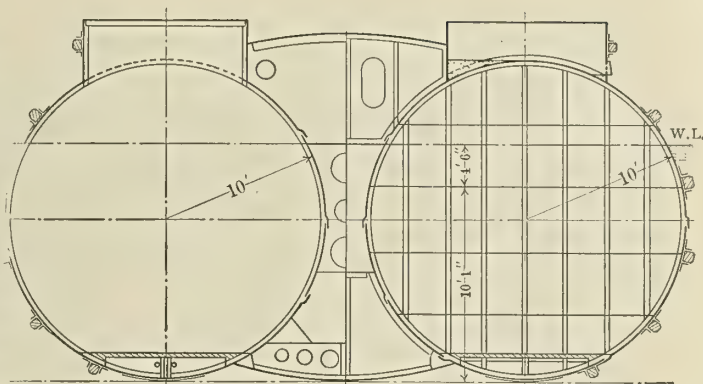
Transverse Section of Le Parmentier Type Ship
